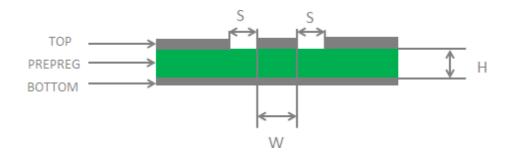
Coplanar Waveguide Design on a 2-layer PCB
